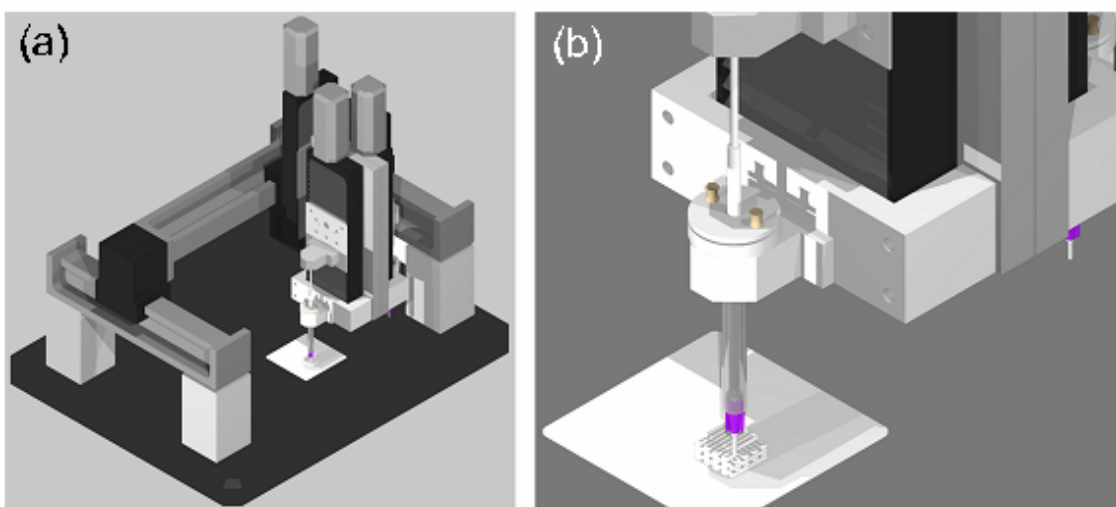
3-D drawings of (a) the robotic deposition apparatus and (b) the syringe holder on the fourth actuator.
